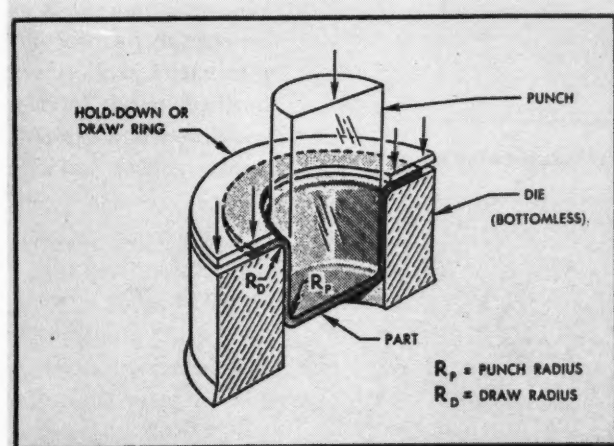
Schematic assembly of die, hold-down ring, and punch
